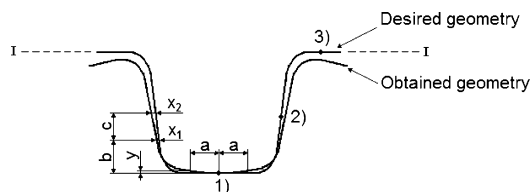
Illustration of spring-back measurements and location of the three thermocouples welded at the longer edge of rectangular sheet specimens.
